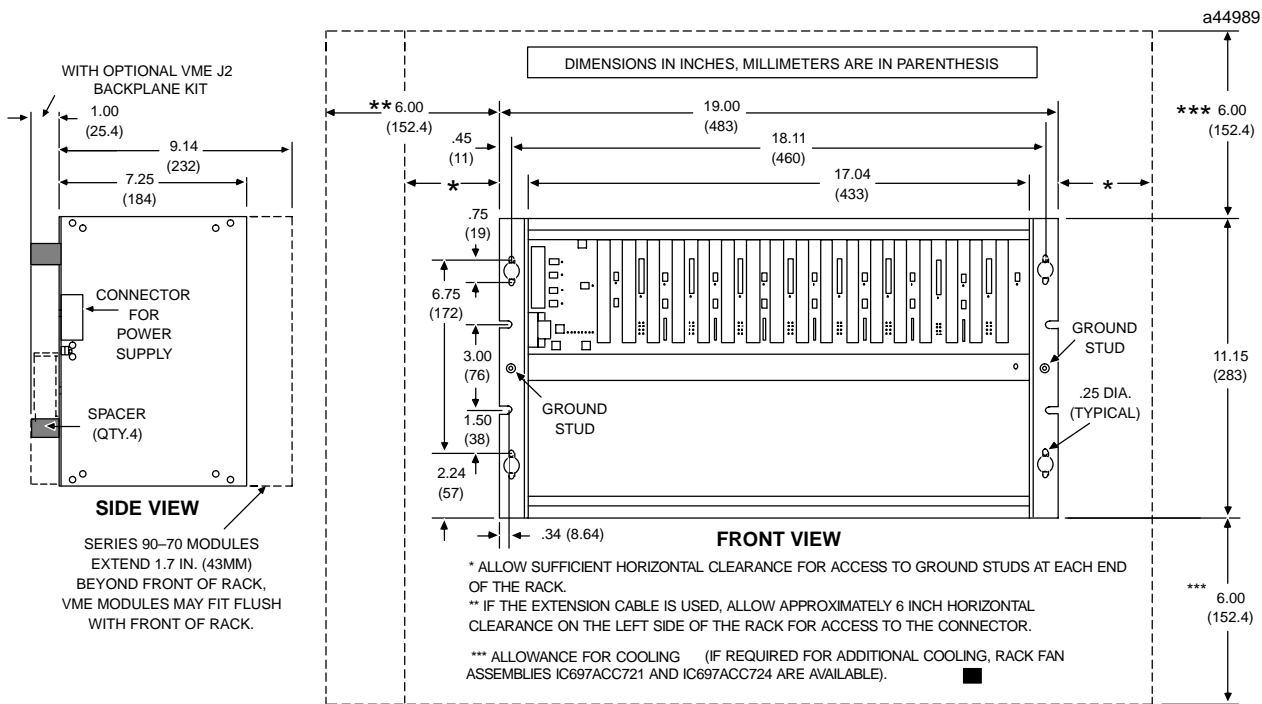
VME Integrator Rack Mounting Dimensions and Requirements for Rear (Panel) Mount Installation
